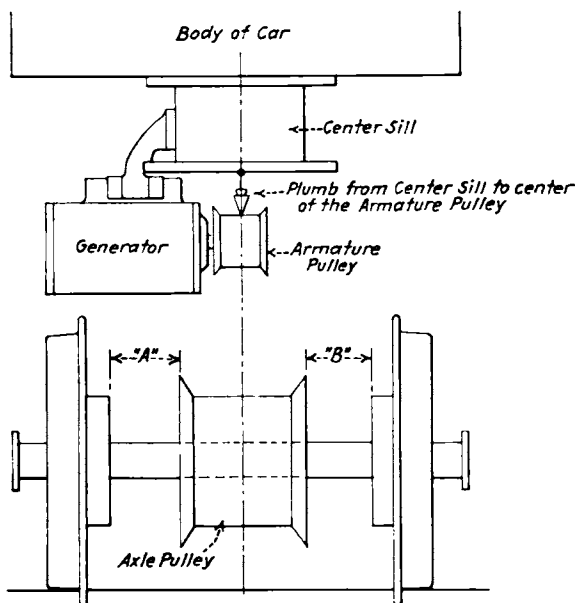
Lining Up Axle Pulley on a Body Type Generator
